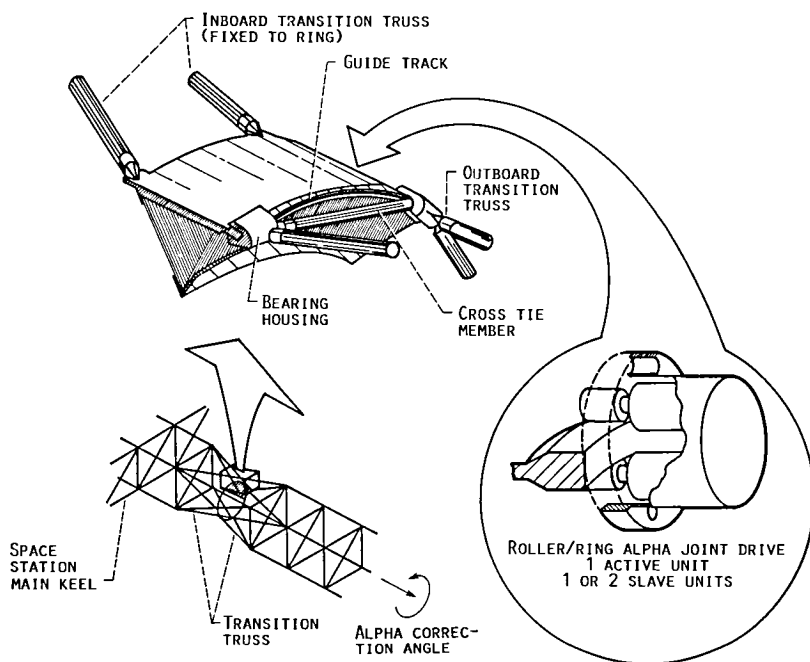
DISCRETE BEARING/DIRECT ROLLER DRIVE ROTARY JOINT CONCEPT.
